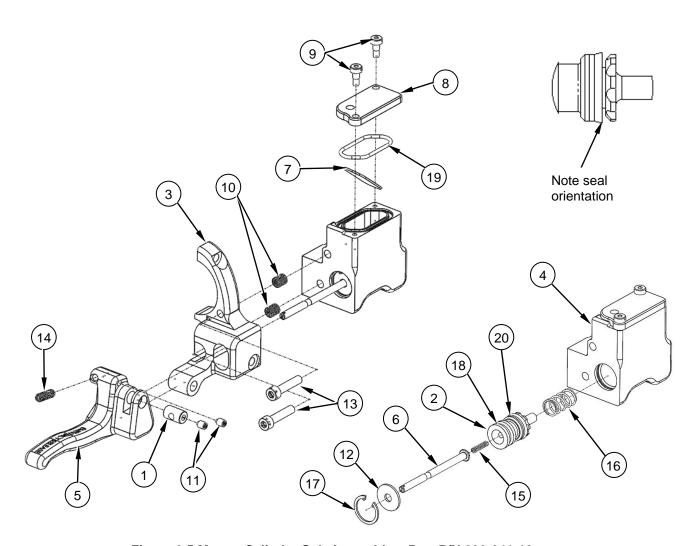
Master Cylinder Sub Assembly – Port P/N 232-641-10
